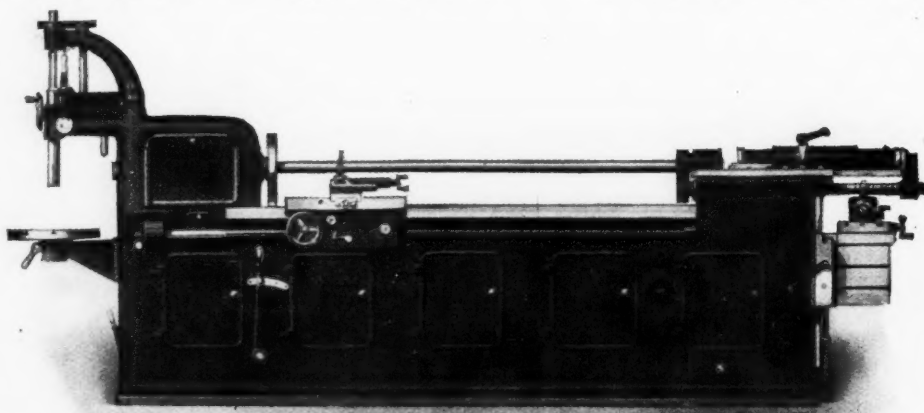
Linderman Universal Machine Tool arranged for the Lathe, Drill Press, Milling Machine Combination
